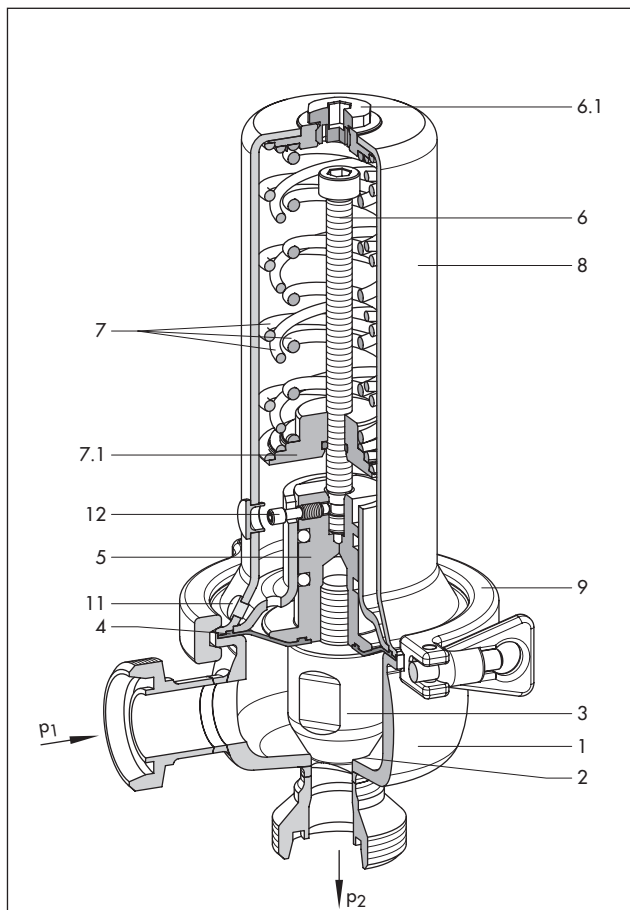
· Type 2371-01 with mechanical set point adjustment
